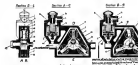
Needle valve mechanism for A.D.C. "Aircore" engine. The 1. (left) shows the needle valve mechanism. The 2. (middle) shows the needle valve mechanism. The 3. (right) shows the needle valve mechanism.
